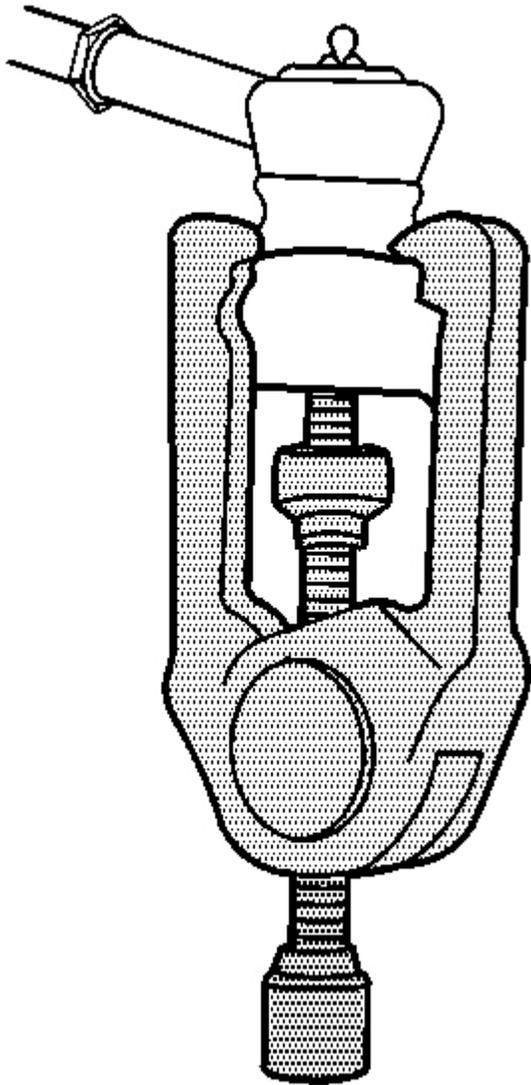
Removing Outer Tie Rod Assembly From Steering Knuckle
